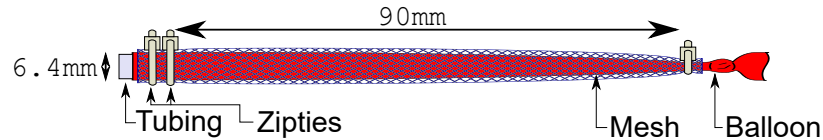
Drawing of McKibben actuator with dimensions labeled.
